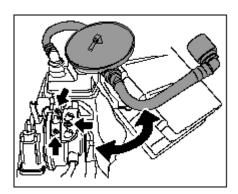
Pressure control valve and leakage diagnosis pump mount Courtesy of PORSCHE OF NORTH AMERICA, INC.
